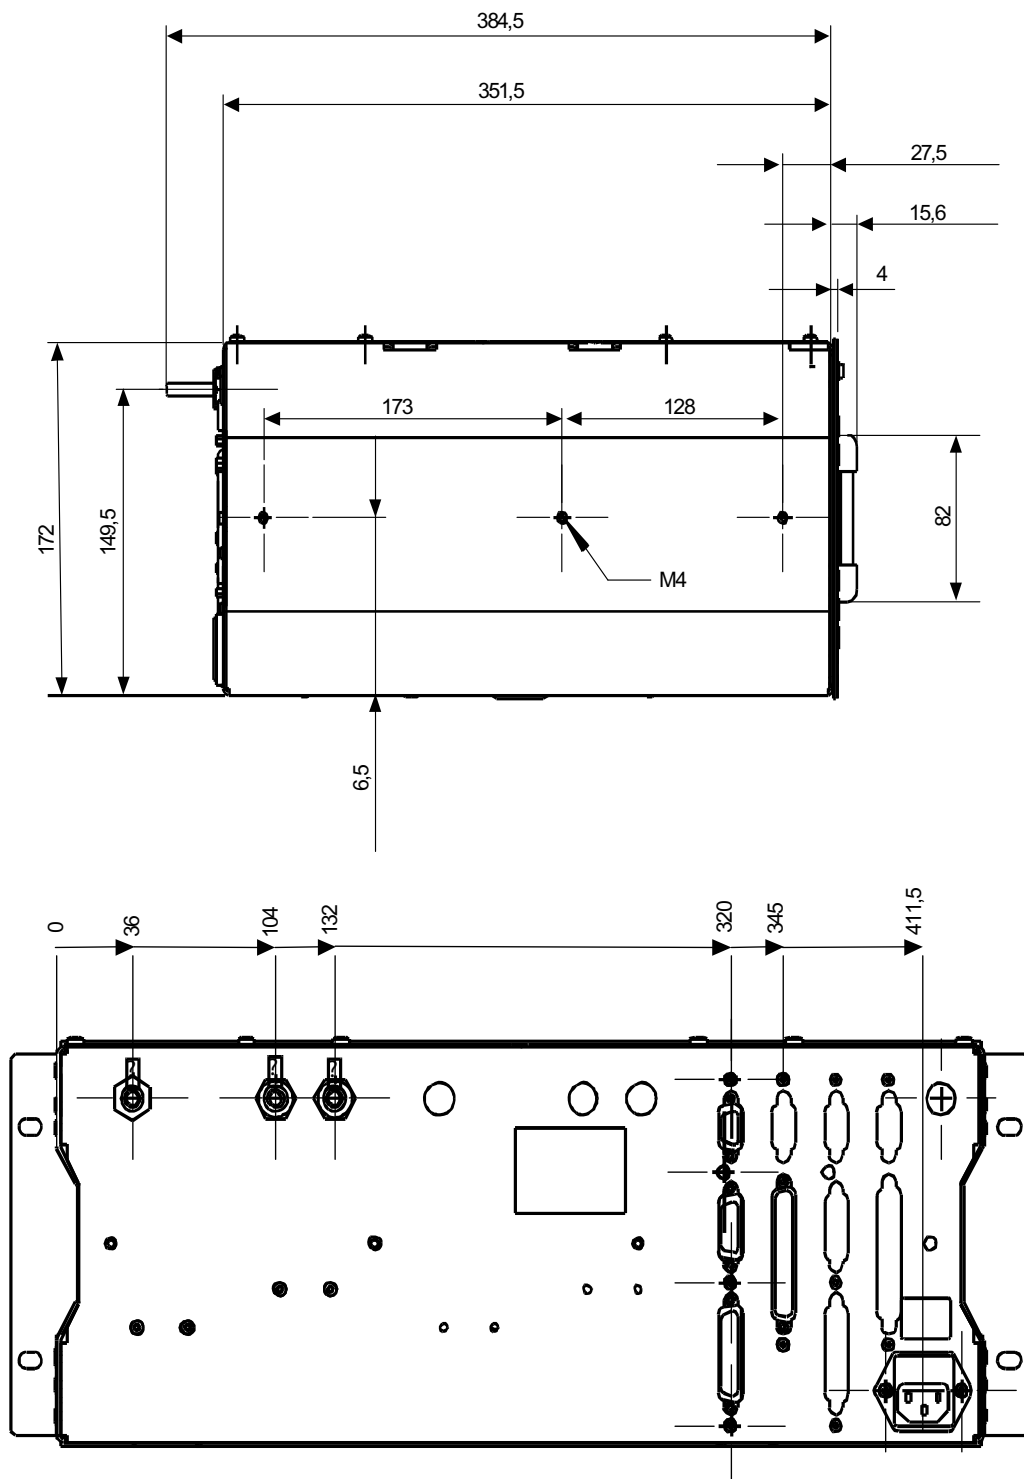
Dimensions for preparing installation (in mm) (front view and plan view)
